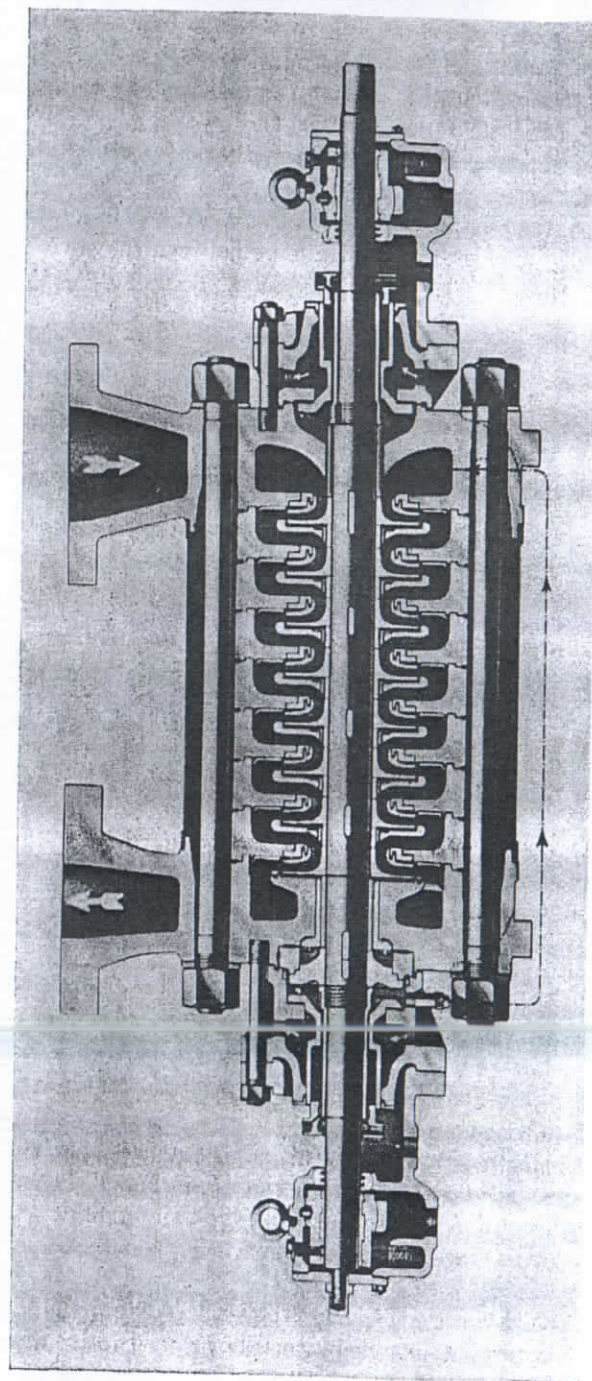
Klein, Schanzlin & Becker high pressure boiler feed pump.
